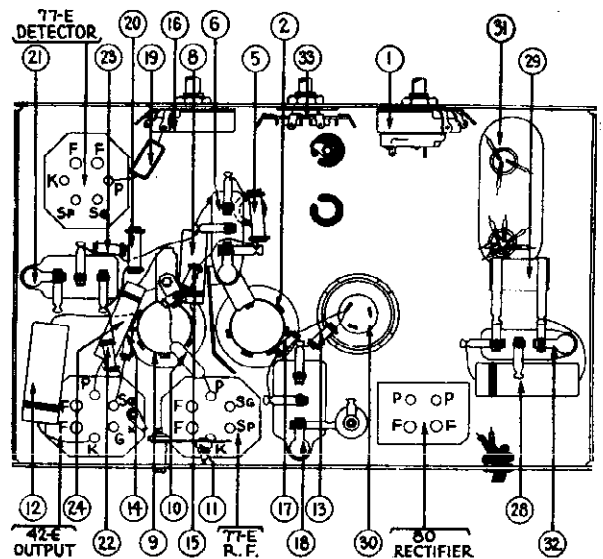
Bottom View of Chassis Showing Parts, and Location of Tube Sockets for Voltage Tests
